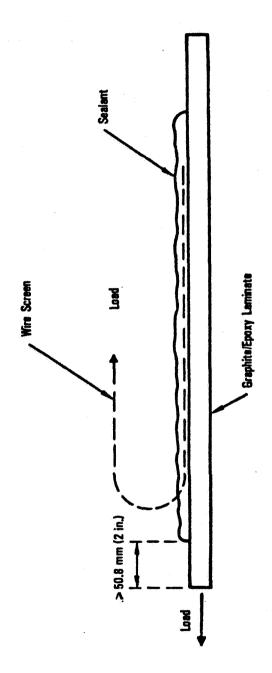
180° Peel Test Per MIL-S-8802E
